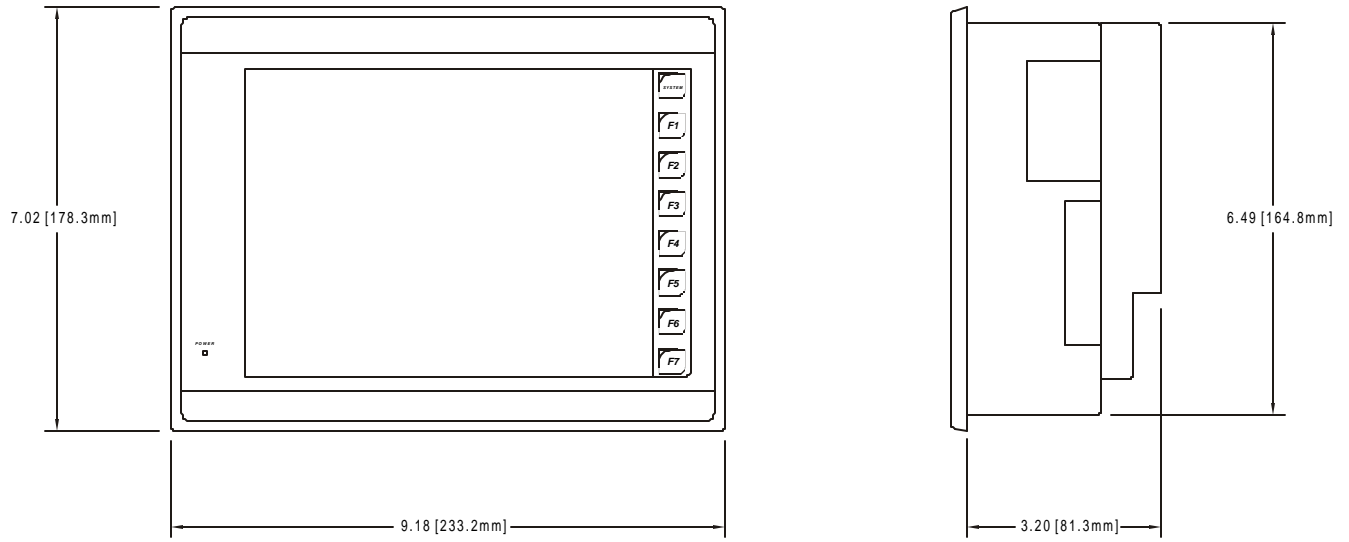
Panel Cut-out and Dimensions for OCS3xx
